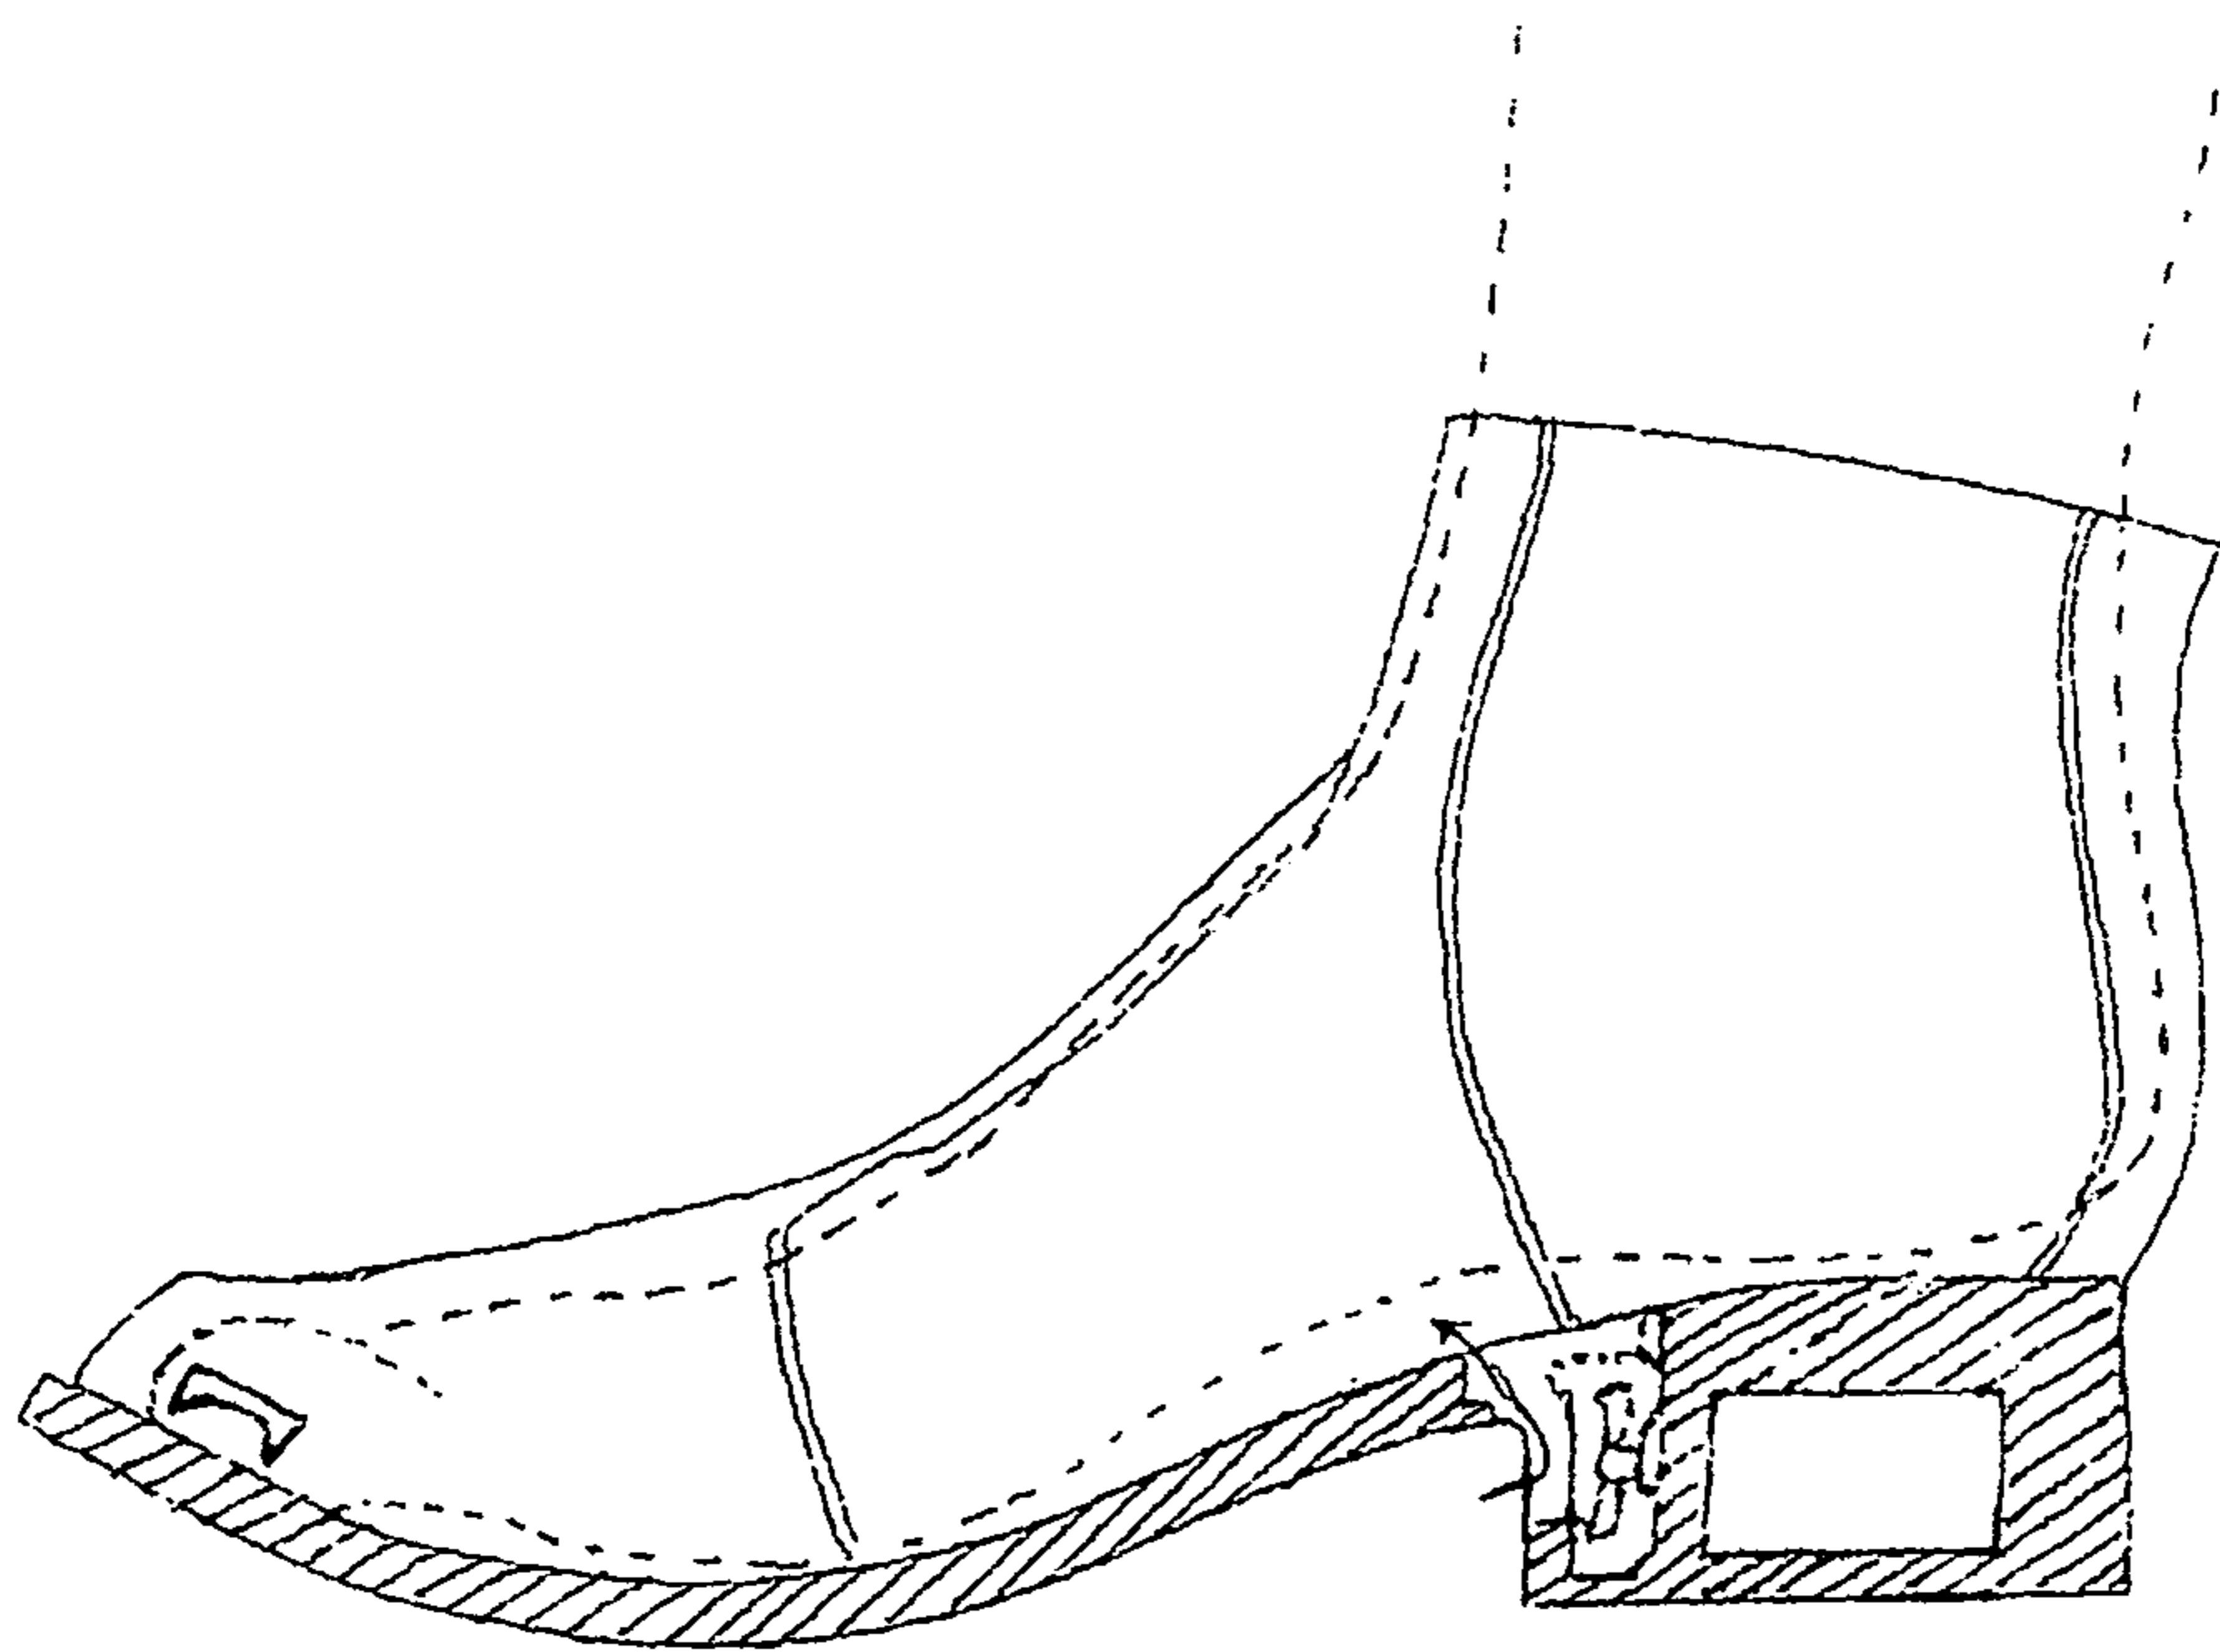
Side elevation view of a typical invented fan force ventilating shoe
